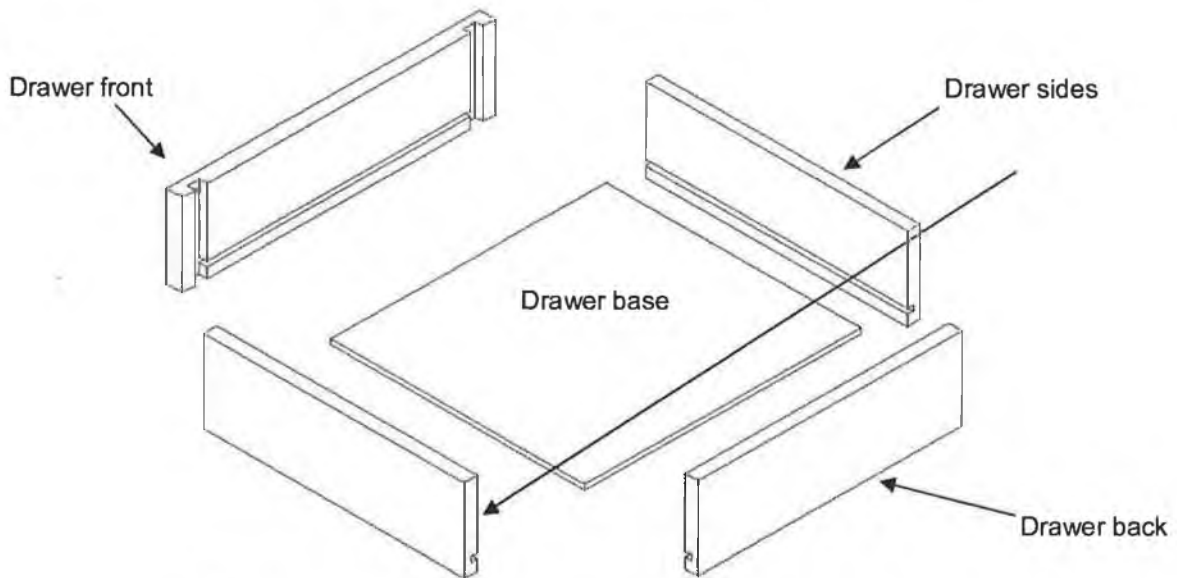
EXPLODED VIEW OF DRAWER COMPONENTS.
